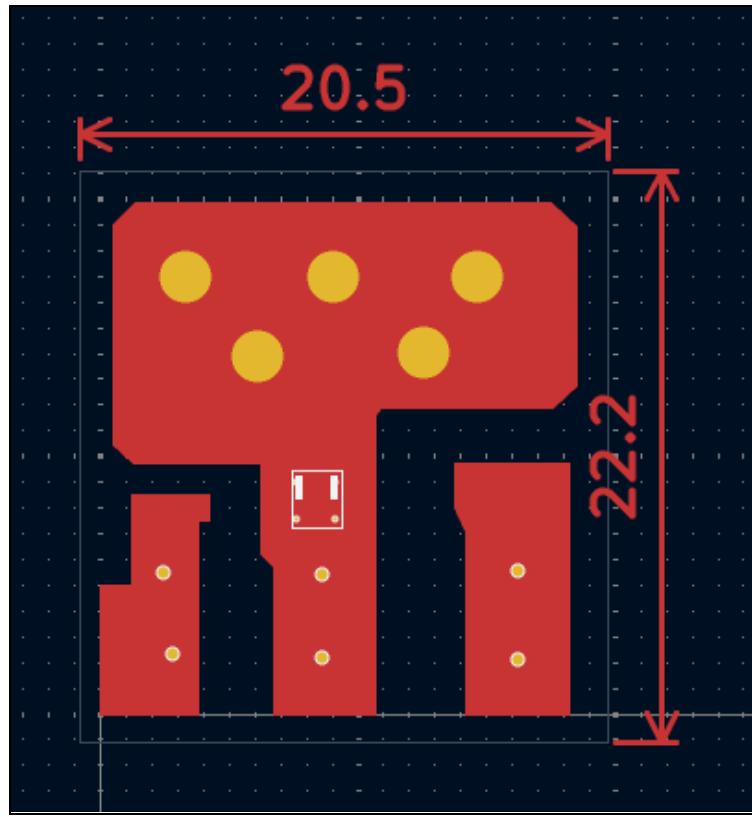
Top View of Two-Layer COB Layout for GaN Power Die Integration in 2D
